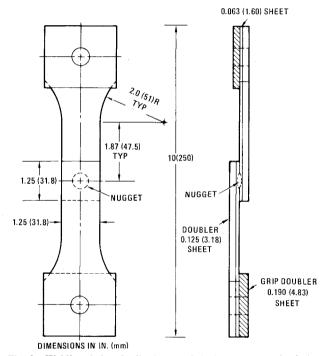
Weldbonded and adhesive-bonded high-load transfer fatigue specimen.
